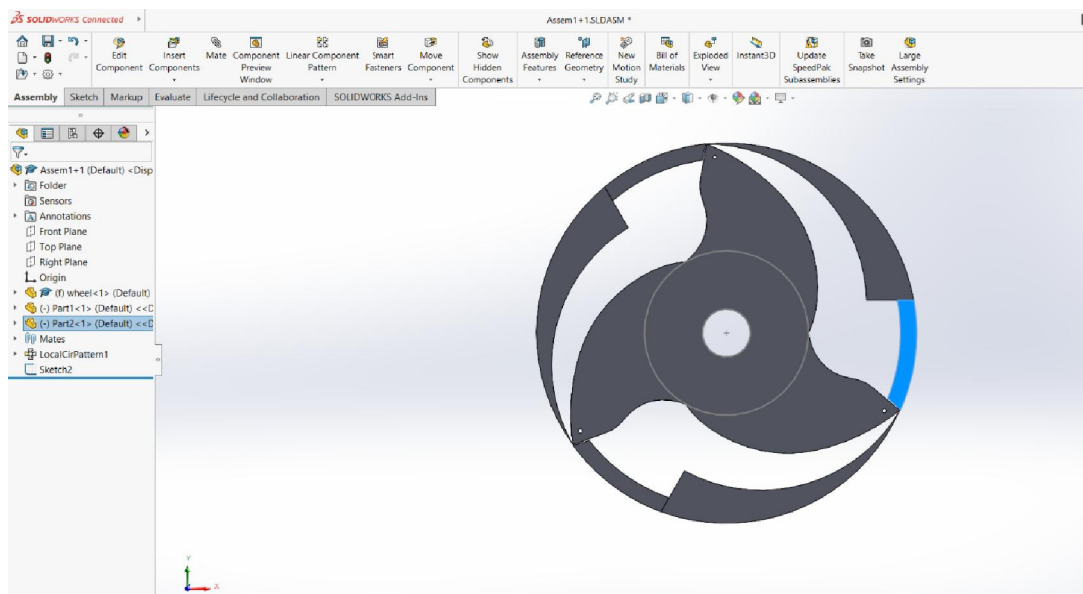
Wheel Assembly Position-1 to adjust the movement (wheel 1 case 1)
